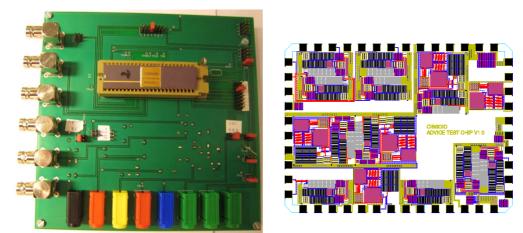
Printed Circuit Board (PCB) development, test PCB with SOI chip version 1.0
